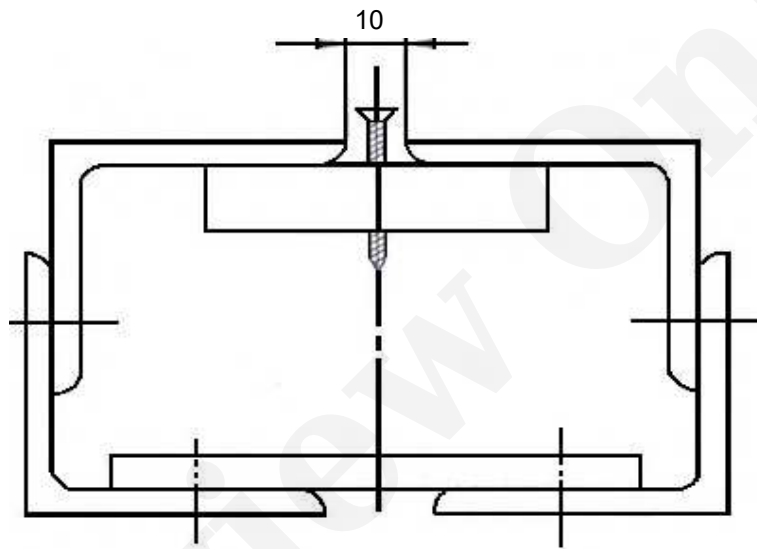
Metal jig for face withdrawal (less than 15 mm)
